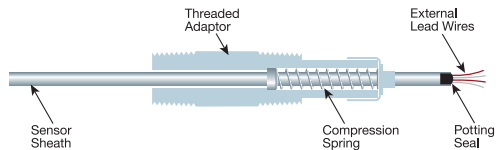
Bayonet Style Spring Loaded Sensor Assembly
